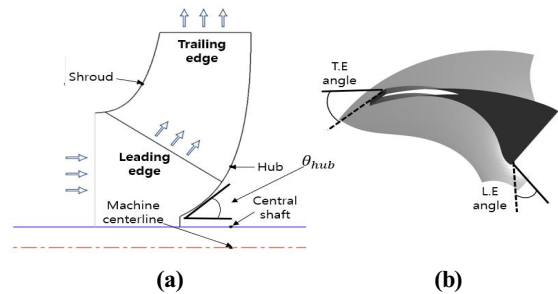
Schematic of impeller(a) and definition of L.E and T.E angle(b)
